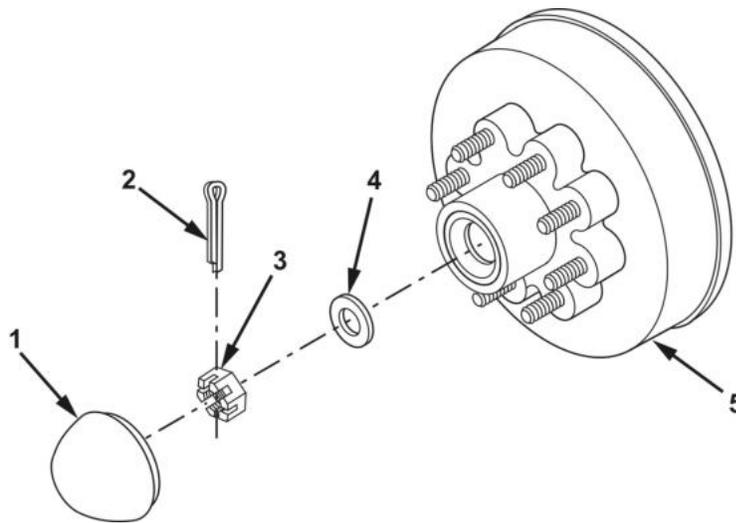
Hub/Drum, Race, and Bearing Seal Removal.
